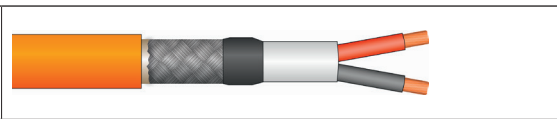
Step 6: Stripping inner sheath/single wires
